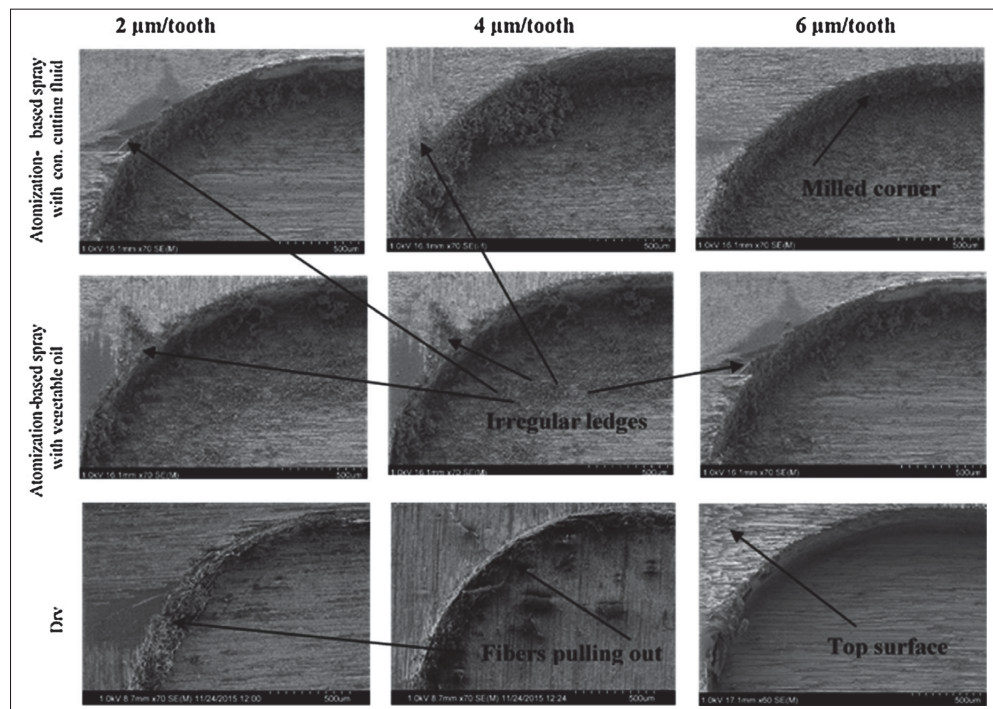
Photographs of burrs formed on the corner slot after machining eight slots
